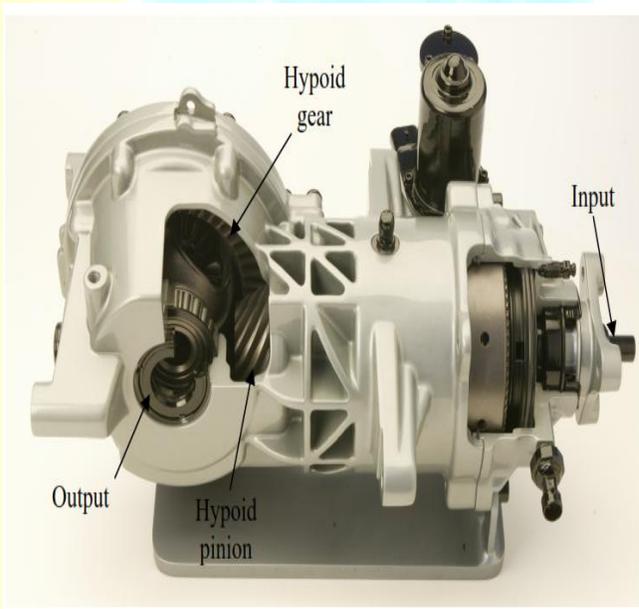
A cut-away of an ‘auxiliary’ axle (Rear Drive Module) used in midsize passenger cars and SUV’s (Courtesy of American Axle & Manufacturing Inc.).
